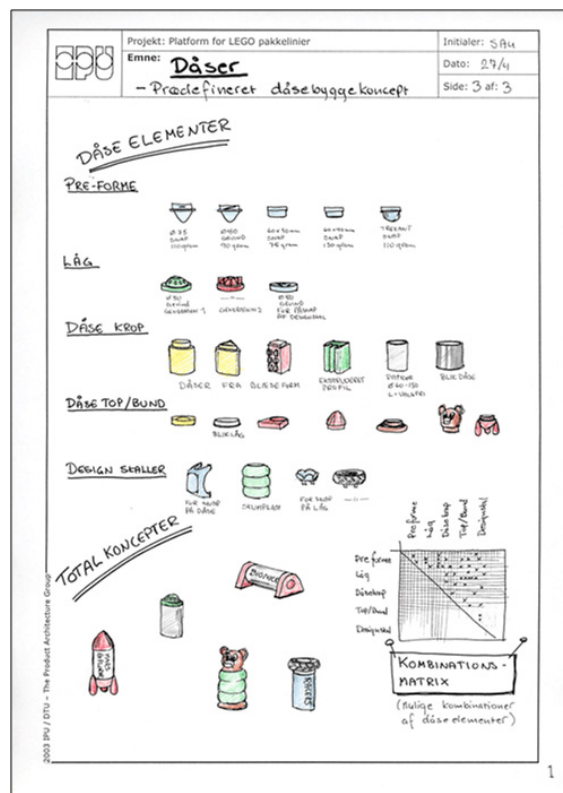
One of the alternative platform concept was that all the different parts of the cans had predefined dimensions, that limited the freedom of design, but enabled reuse of the packaging equipment.
